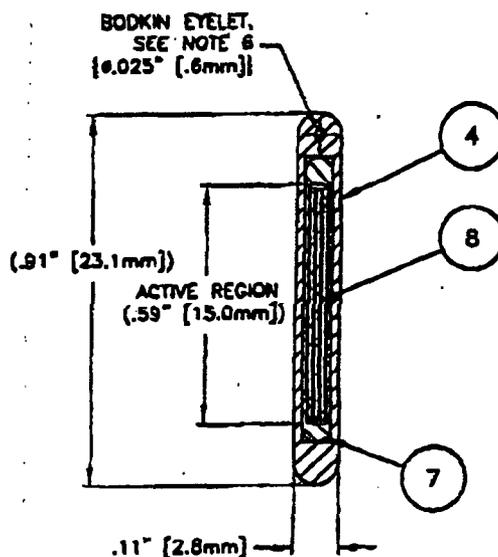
Cf-252 Applicator Tube (AT) Assembly
